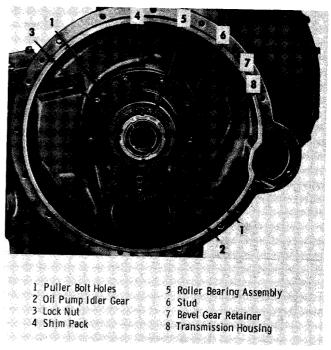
Matched bevel pinion gear, installed (VH, VSI series)
